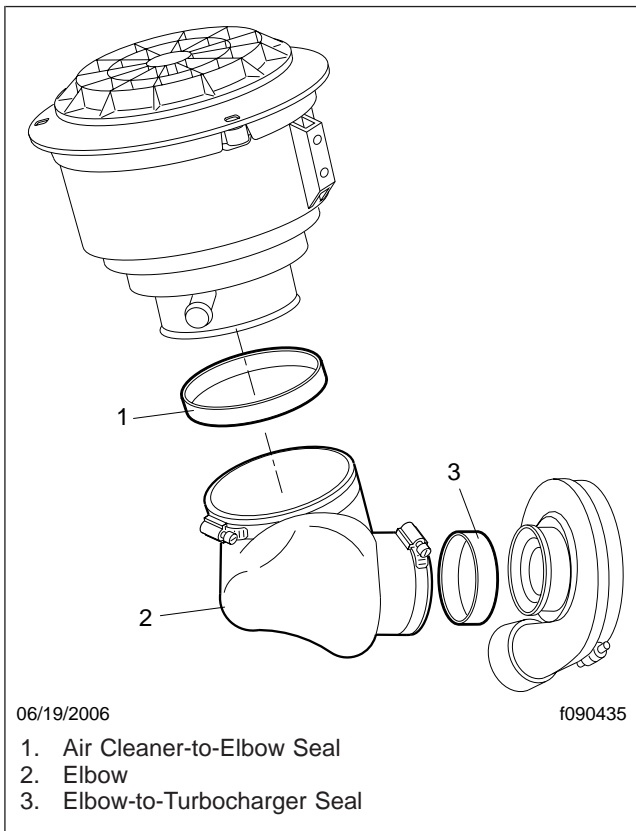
, Typical Elbow-to-Turbocharger Configuration (CAT C7 engine shown)
